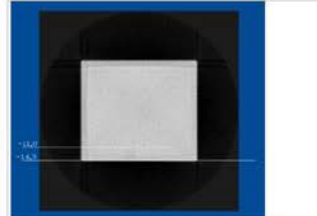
CT-slice #17 (z=108.72 mm) of test block P31 (MN 220 AD U 1), crack depth: 3.9 mm (= 2 pixel = 0.24 mm), 12.9% of weld thickness
